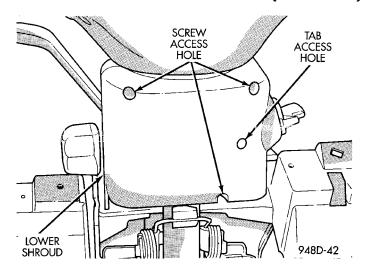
Key Lock Cylinder Access Hole In Steering Column Shrouds
